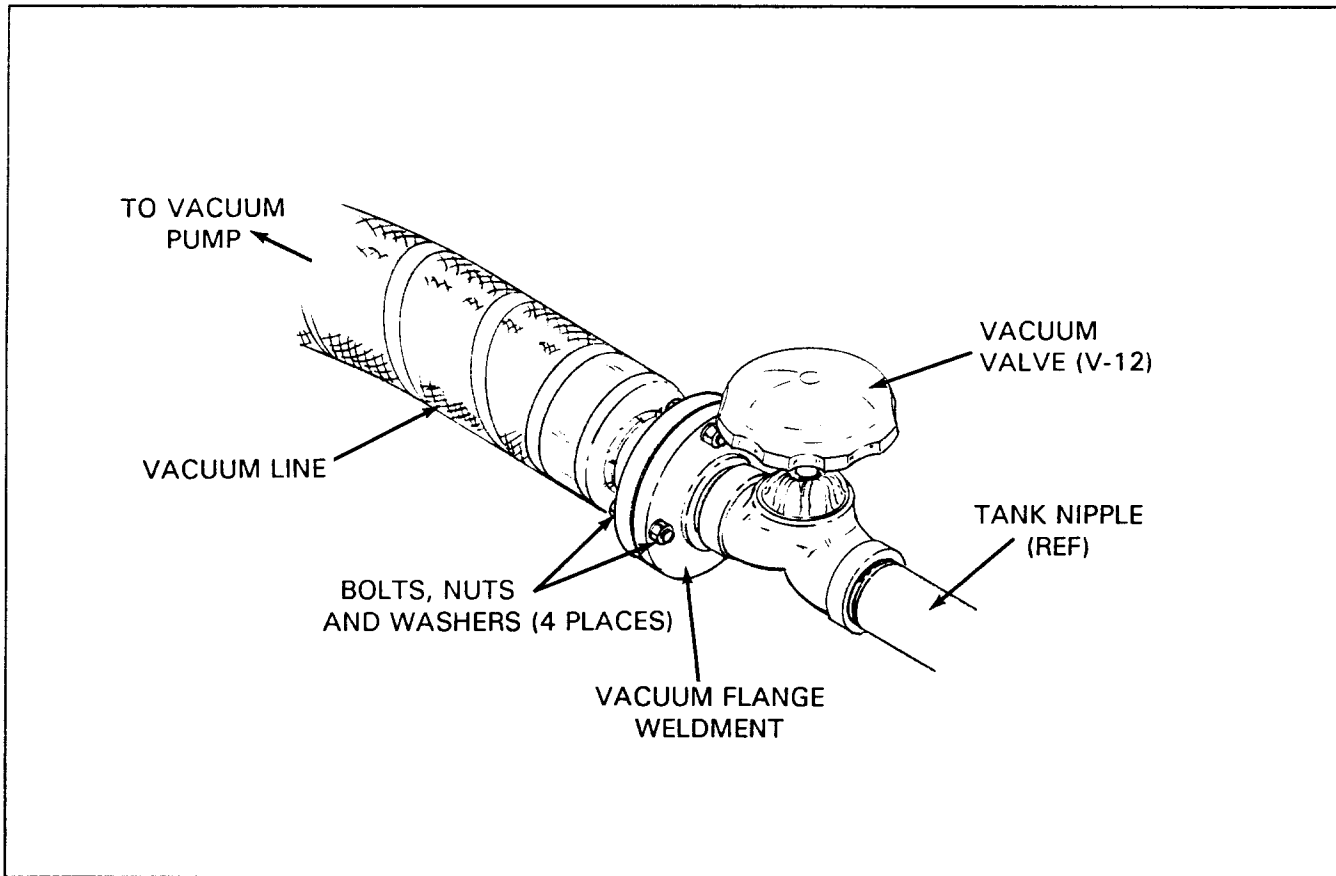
Evacuation of Annular Space using Vacuum Valve Assembly
